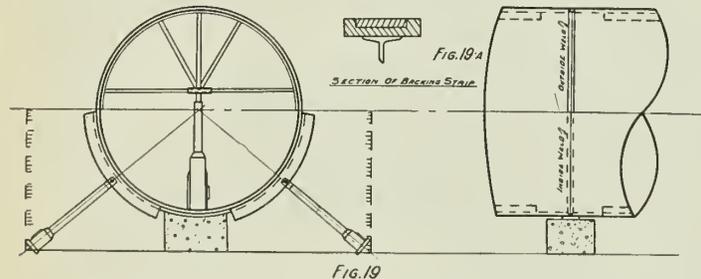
and 19a—Backing Base for Field Welding.
